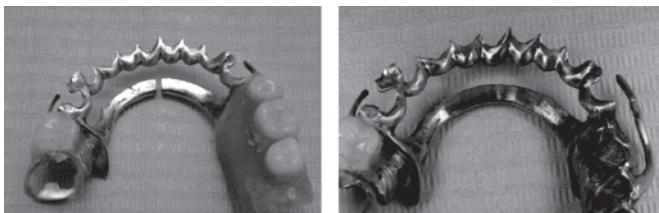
Broken lingual bar repaired by pulsed laser welding with filler material [11].
